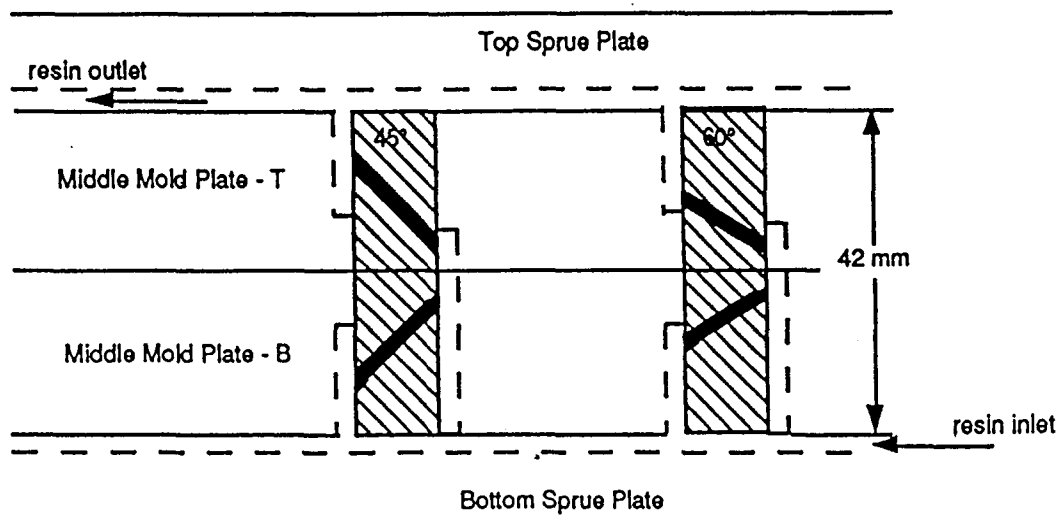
Four-part mold for in-situ VPI shear/compression specimen production.
